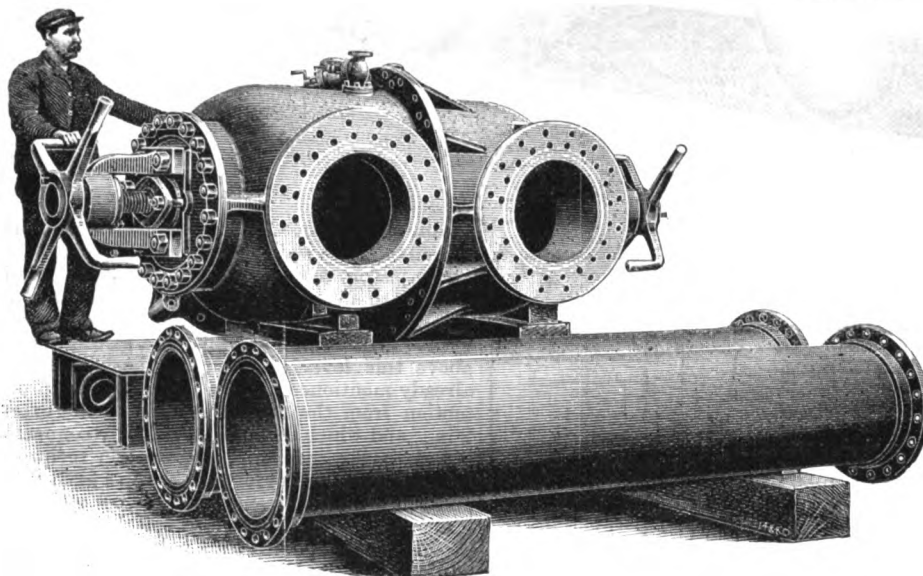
MAIN STOP VALVE AND LAP-WELDED IRON STEAM-PIPES.
